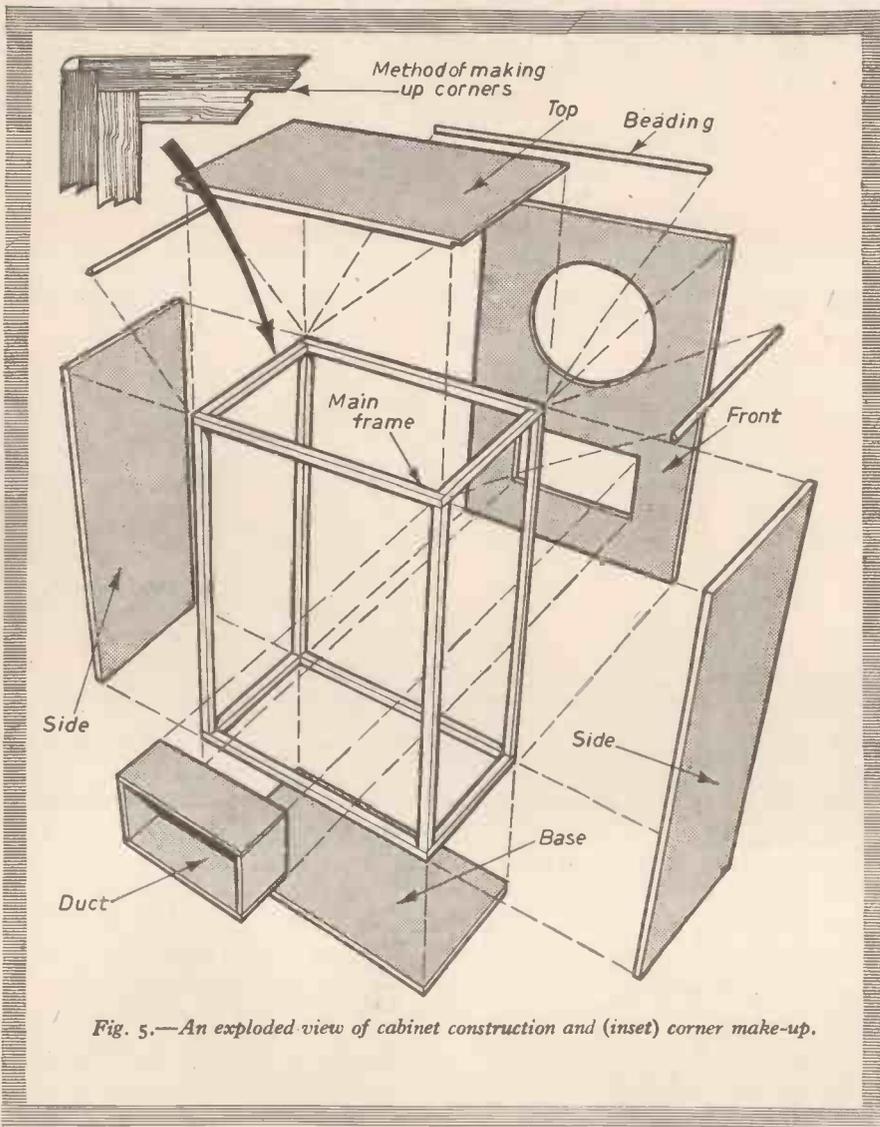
An exploded view of cabinet construction and (inset) corner make-up.
